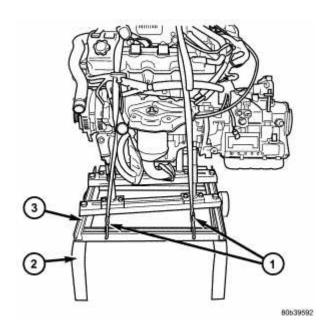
Identifying Engine Removal Cradle Courtesy of CHRYSLER LLC
